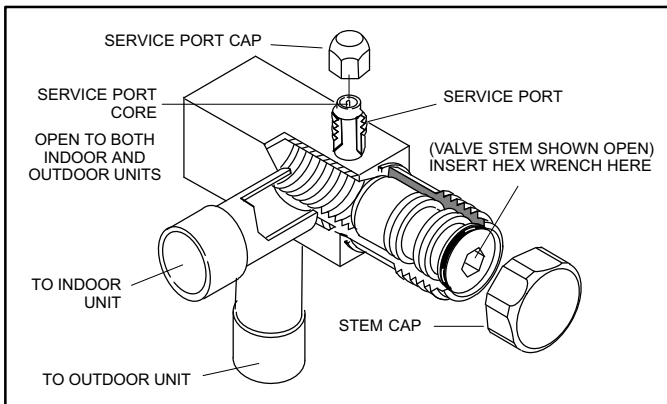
Angle-Type Service Valve (Back-Seated Opened)
